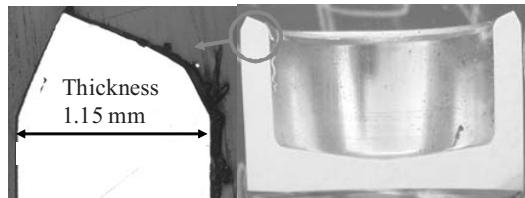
Deformed billet and extruded tip formed using Al 6061-O specimen.
